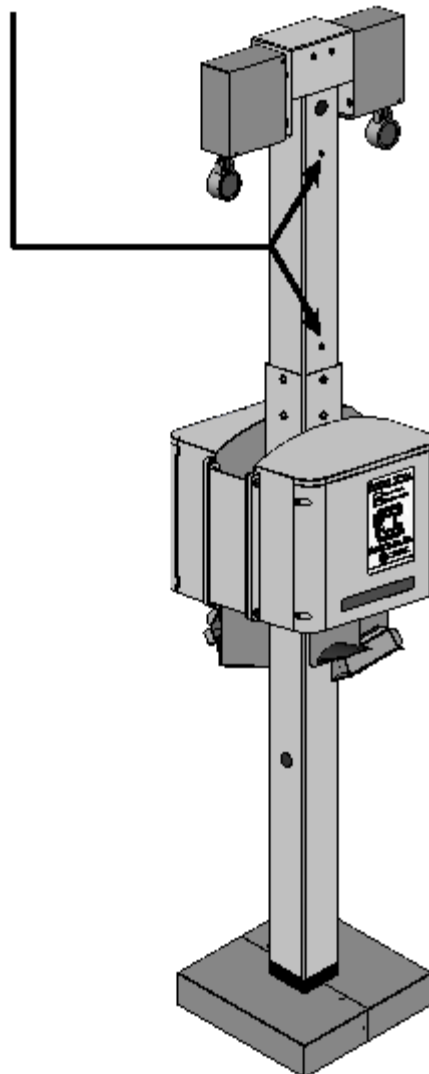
Mounting the Second of Two Chargers with Dual-Mount Kit
